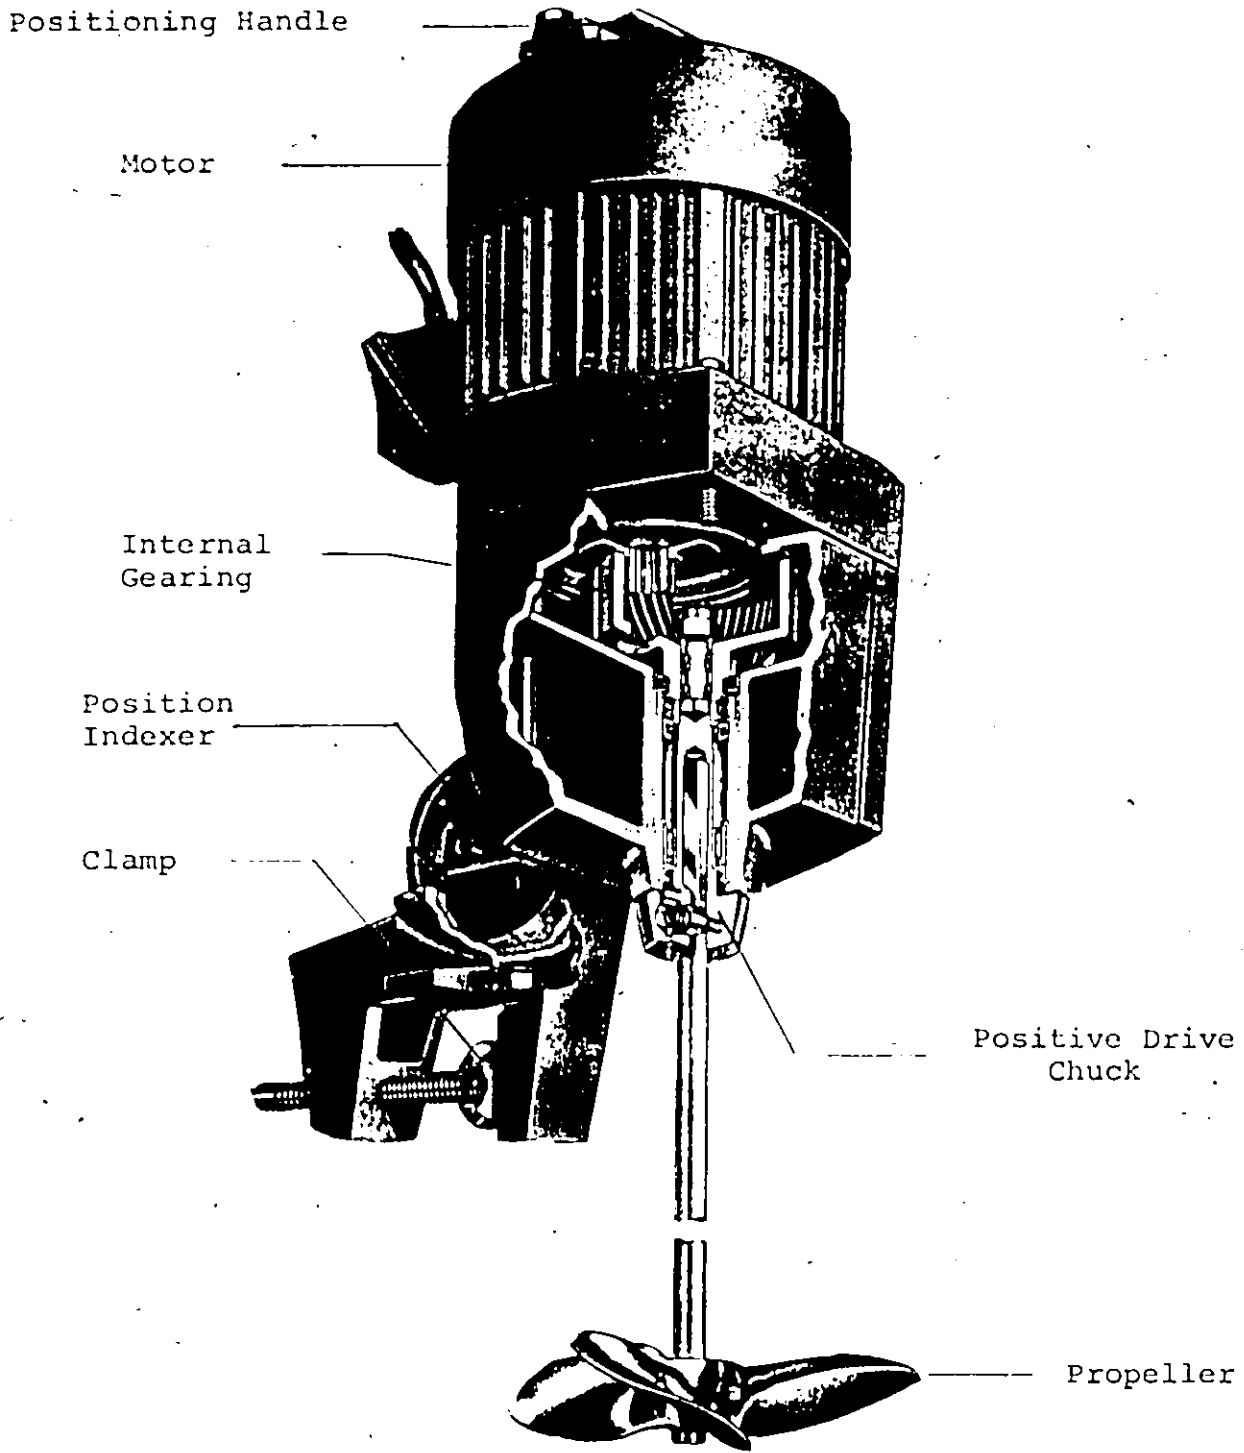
Lightnin Mixer Components and Internal Gearing
